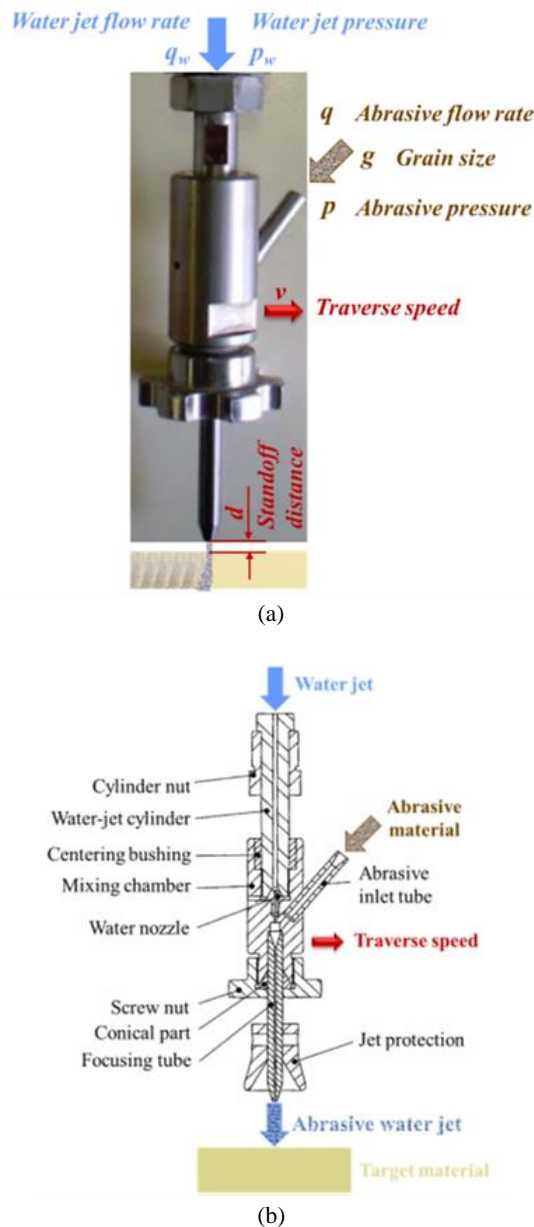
Principle of AWJ machining: (a) process parameters (b) components of cutting head [12].
